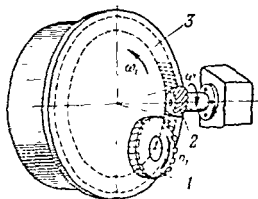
Curved-tooth bevel gear being cut on a generating type machine
